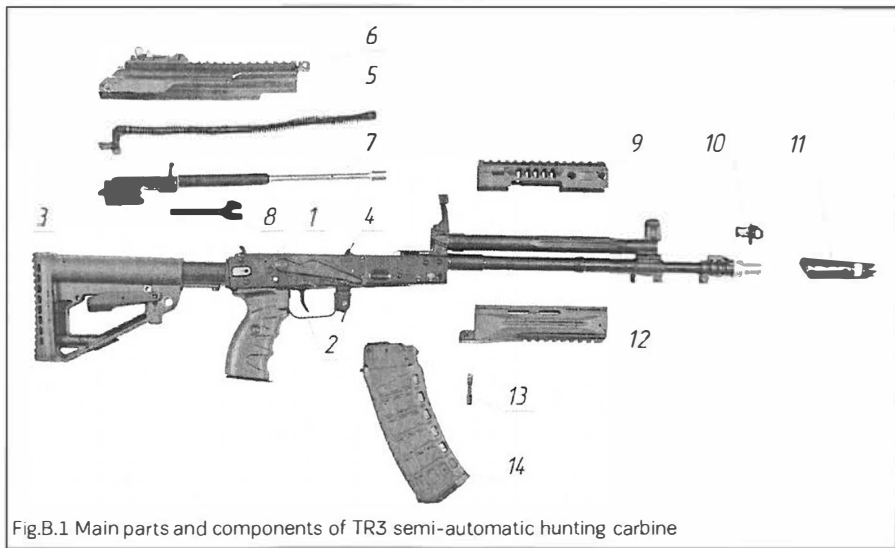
Main parts and components of TR3 semi-automatic hunting carbine
